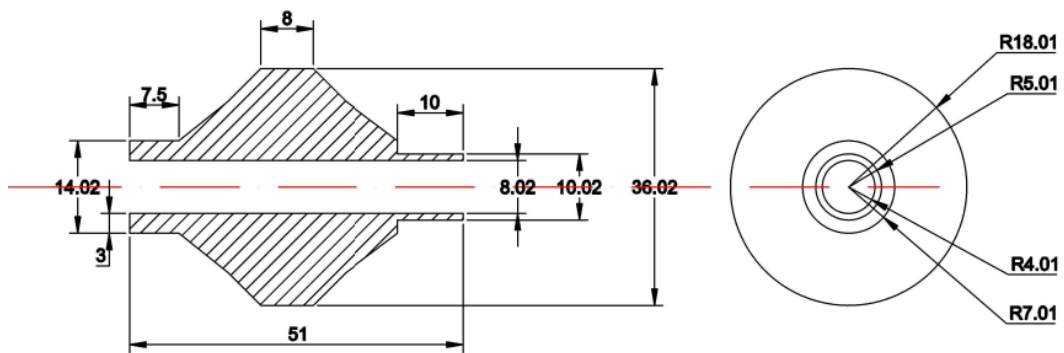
Adapter for nozzle fitment (Sectional View)
